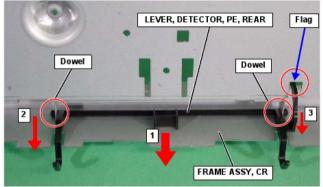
LEVER, DETECTOR, PE, REAR Removal
